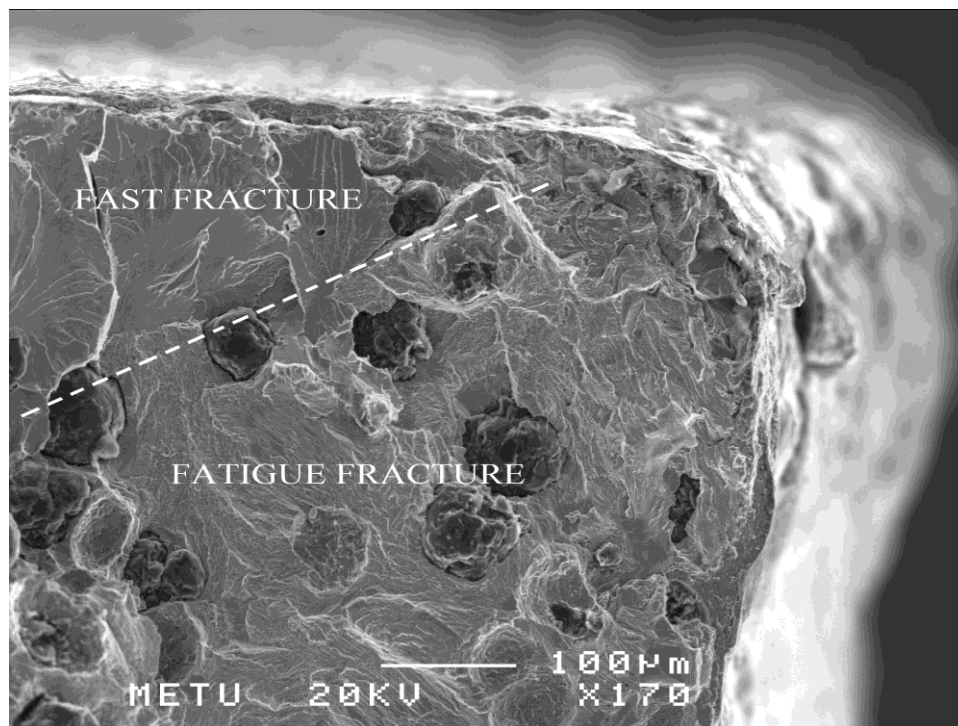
Crack starting location of cast piece. Fatigue and fast fracture regions of specimen AW1 are shown
